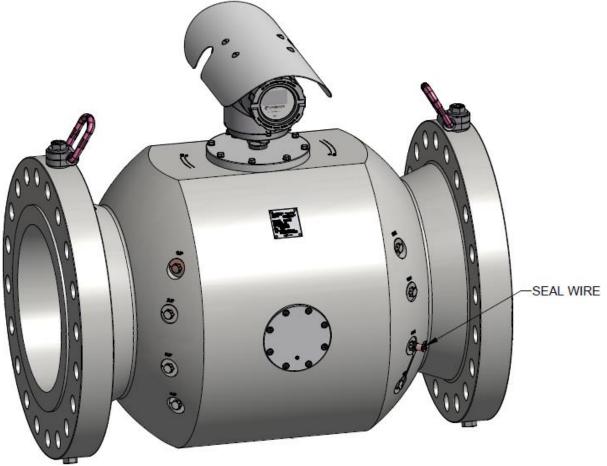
Seal Wire on Meter Body (Single Transducer Cover Style)
